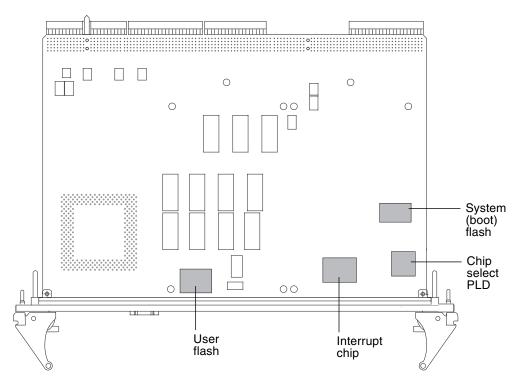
Typical Netra CP2160 Board – Solder Side
